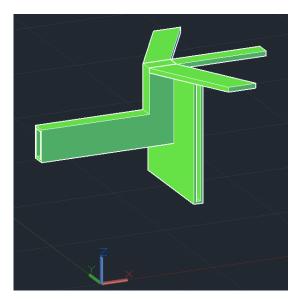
CAD model of the tracker that could be inserted on the tool head. Optical markers could be placed on the three hands above.
